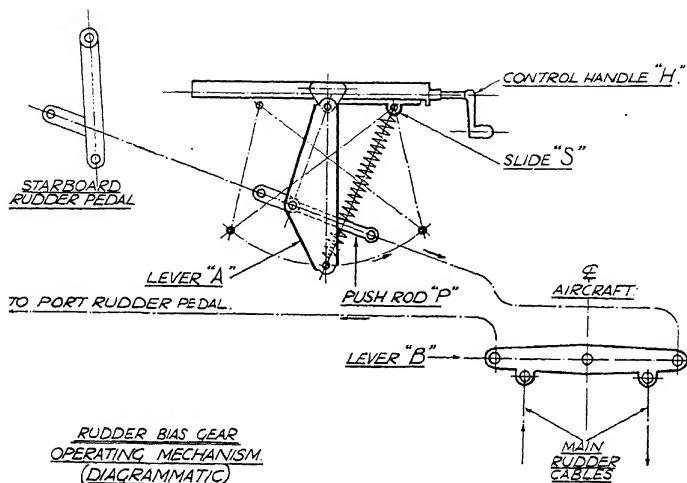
RUDDER BIAS GEAR OPERATING MECHANISM.
